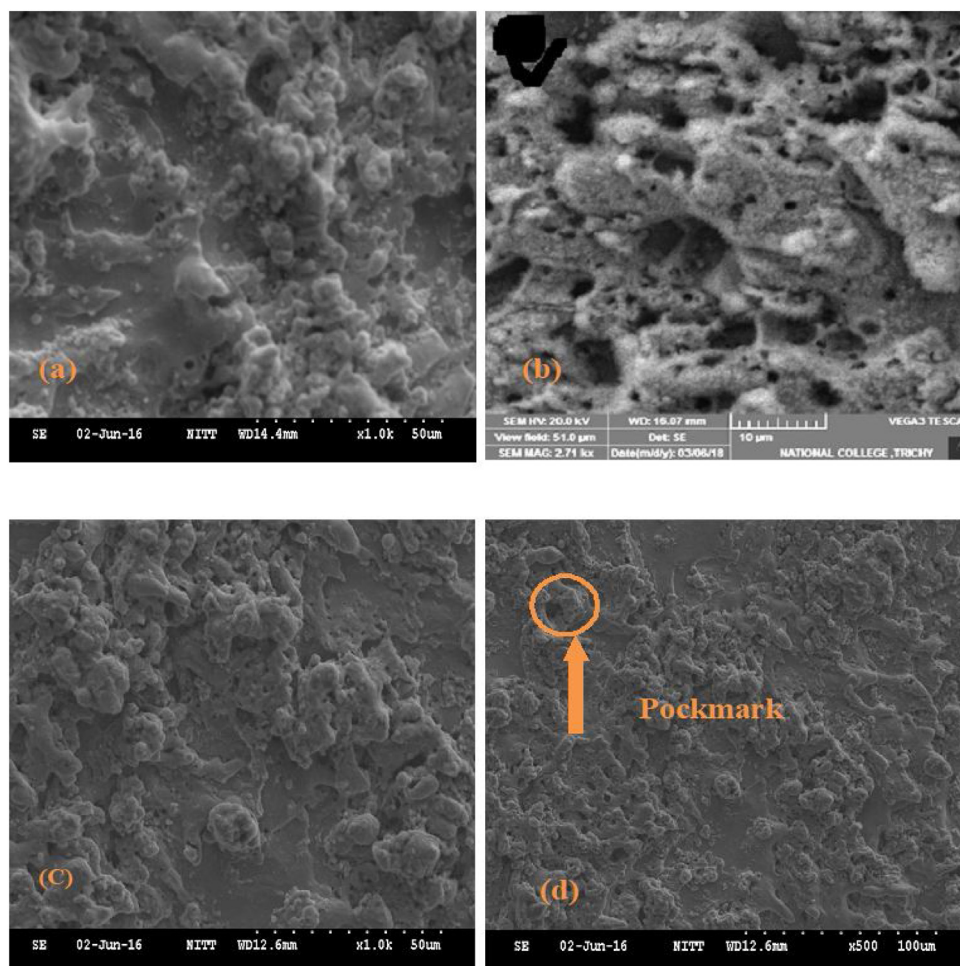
SEM images of machined surfaces of Inconel 600: (a) Exp. No. 4, (b) Exp. No. 8, (c) Exp. No. 12 and (d) Exp. No. 16.
